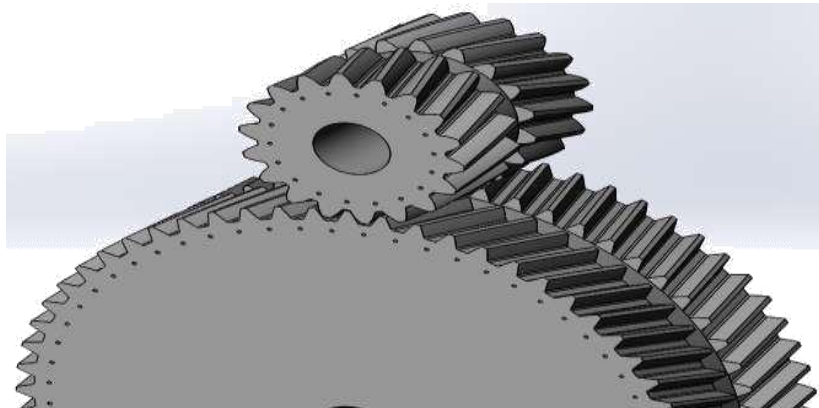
2D Drawing of Gear with Hole Module 12 Gear Dia 234 & Dia 675
